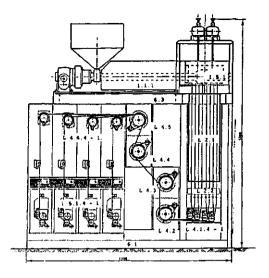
Compact FDY spinning machine of Erdmann [86], having 8 threadlines, up to 4 drawing zones and 2 threadlines per winder
